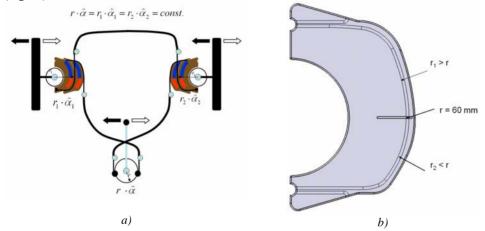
a) Steering by Bowden cables. b) The Adjusting rope-wheel.
